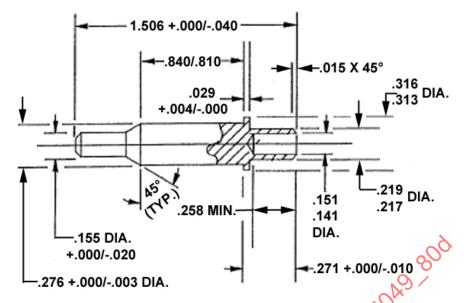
ACCESSORY DIMENSIONS AND CONFIGURATION FOR SIZE 8 CONTACTS
